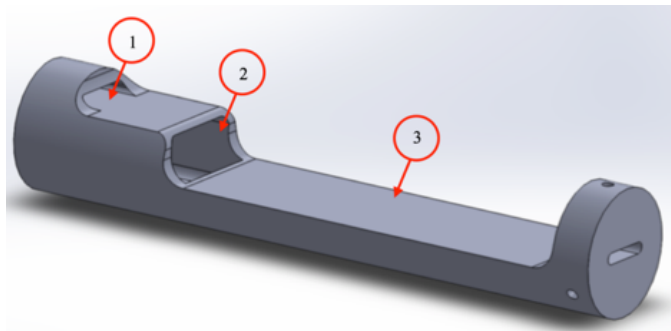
Electrical housing 3D model, where (1) SD Module fixture; (2) 9V-battery holder; (3) PCB platform.
